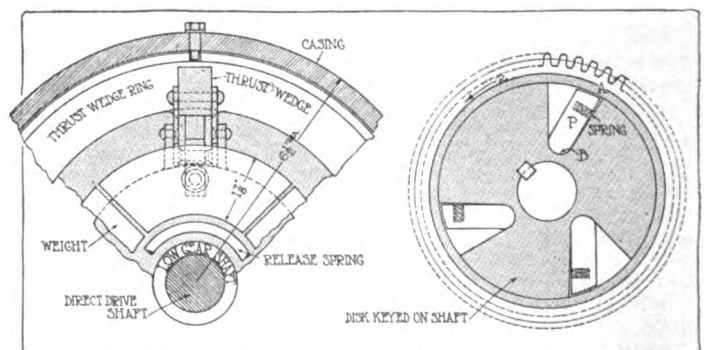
Clutch engaging mechanism and slip gear with pawls
